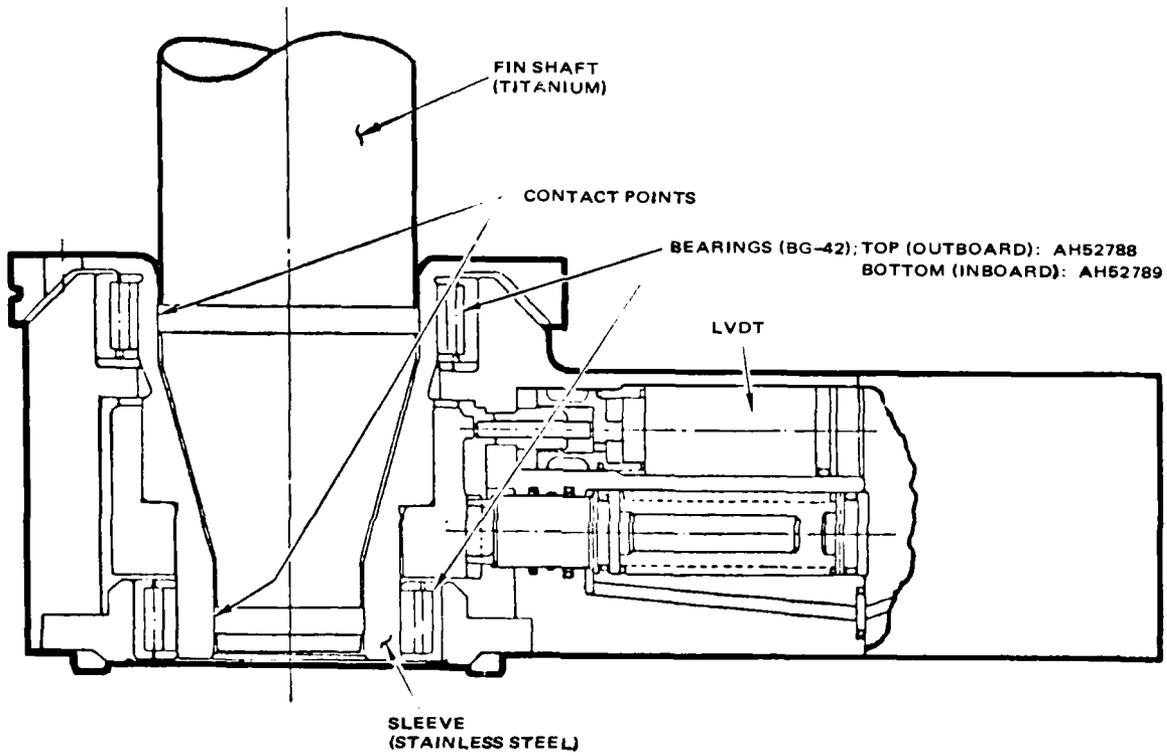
ASALM – Activator design-bearing detail (MDAC).
